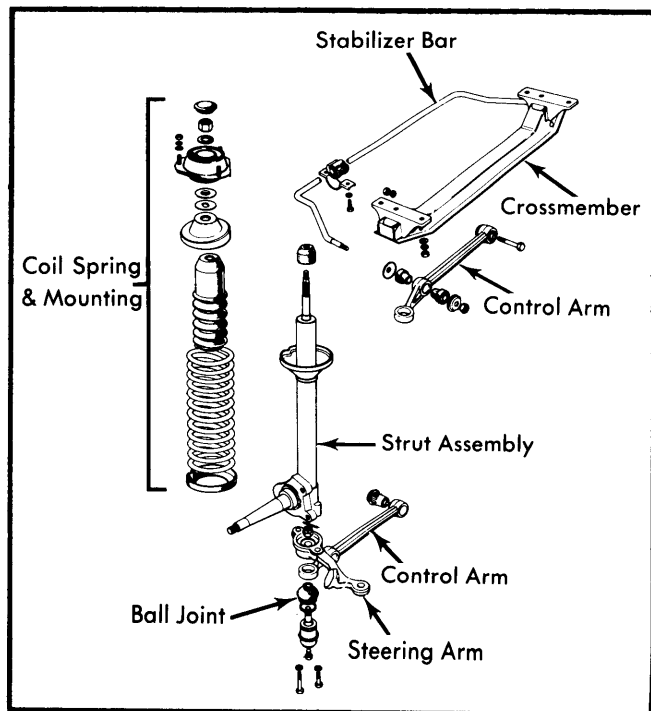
Exploded View of Mizer & 808 Front Suspension
